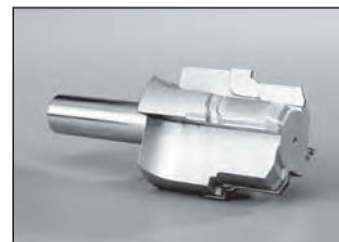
ISO 6149-1 Straight Thread Port Counterboring Tool with ID Groove
